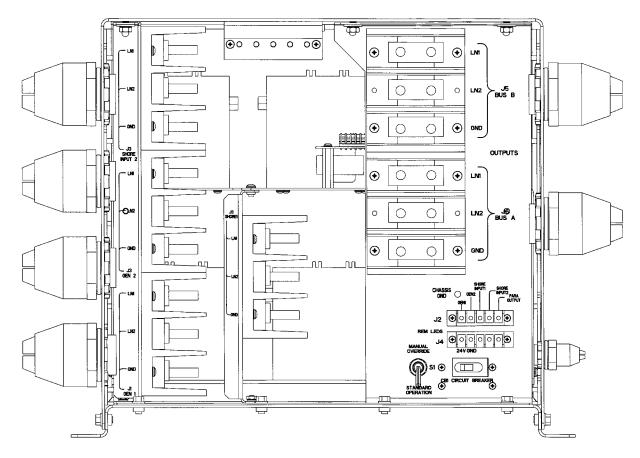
Wiring Contacts for the AC Master Controller (all covers removed)
